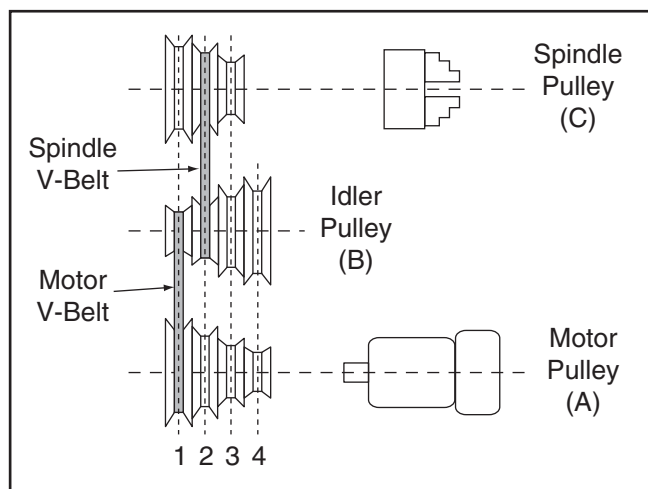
Lathe V-belts configured for a lathe spindle speed of 1250 RPM.
